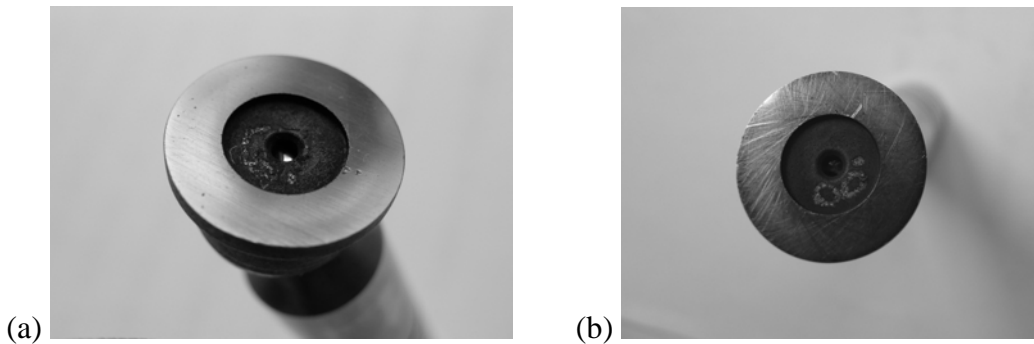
A photograph of the shoe front-surfaces after 2000 hours on (a) DLC piston shoe, (b) steel piston shoe.
